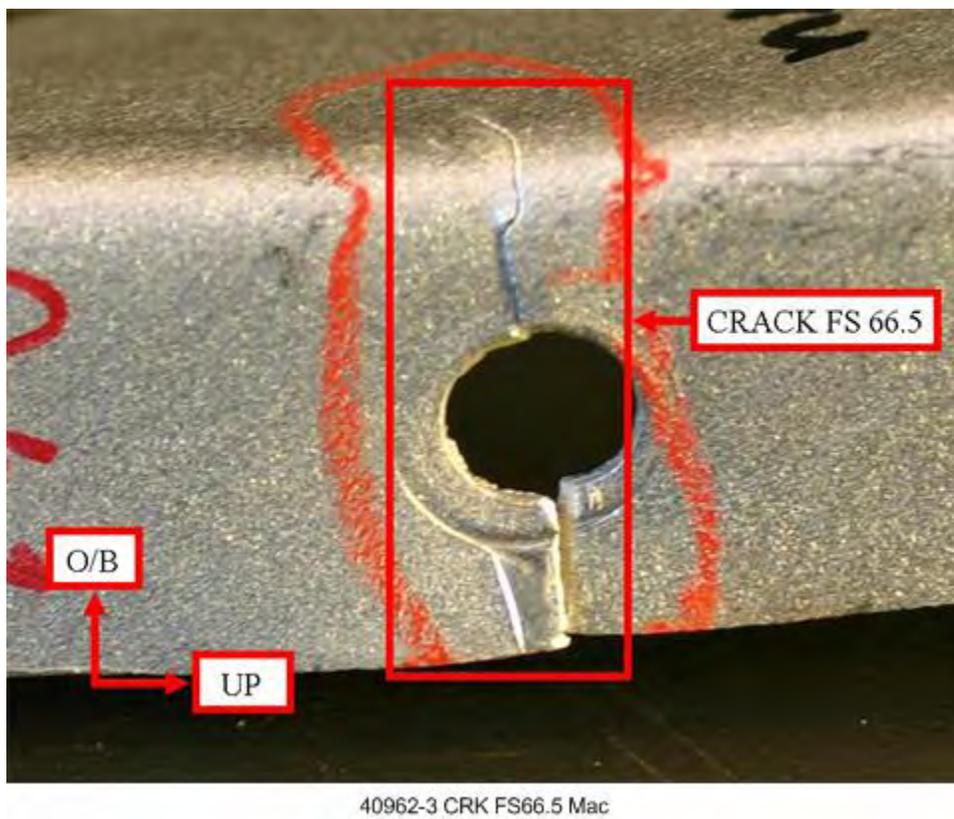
Macroscopic View of Crack on the Fuselage Bulkhead Assembly FS 66.5
